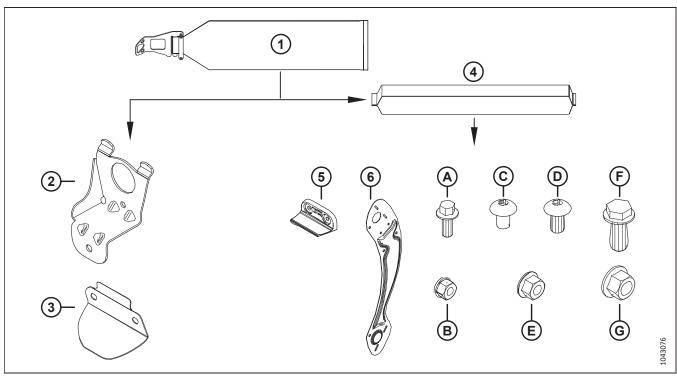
Five-Bat Reel Endshield Parts Bag (MD #368327)
